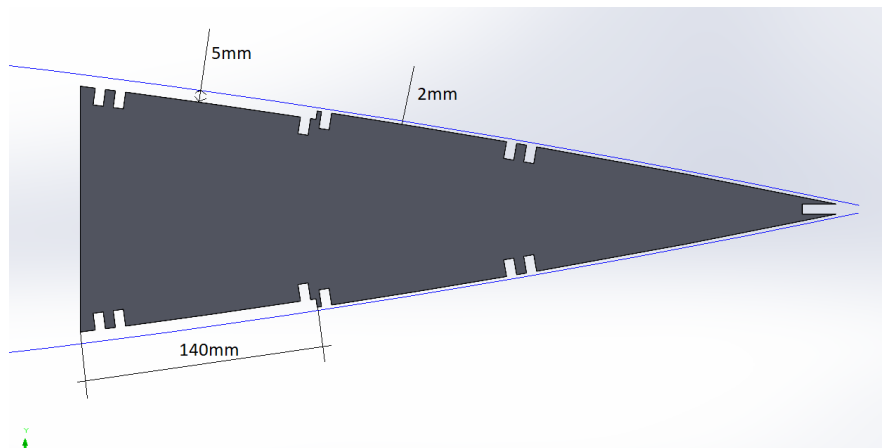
The mould rib is offset with respect to the wing profile, accounting for mould and part thickness.
